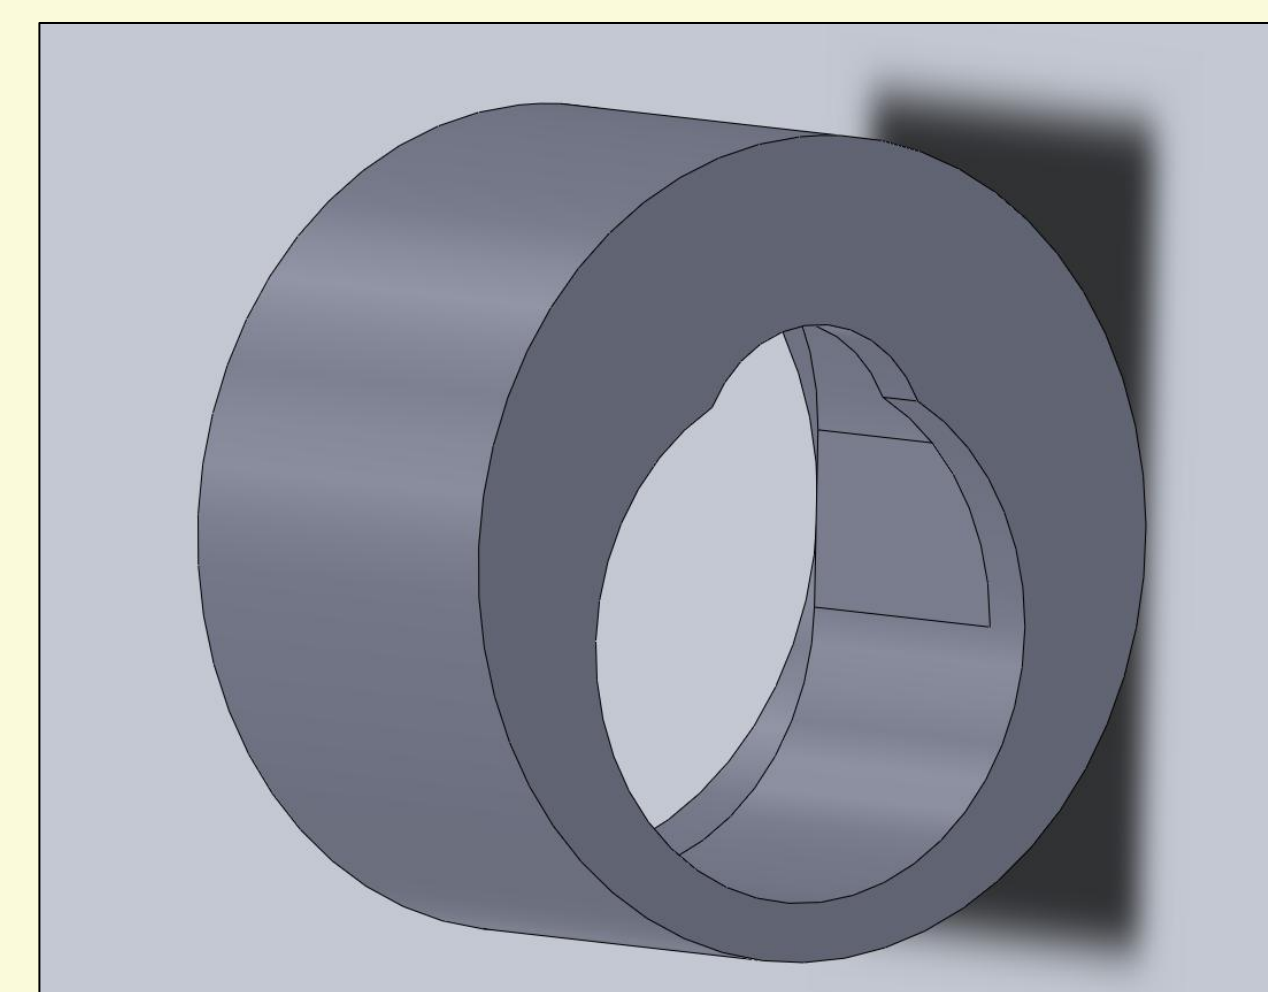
SolidWorks model of final design focused on abutment insert hole.
